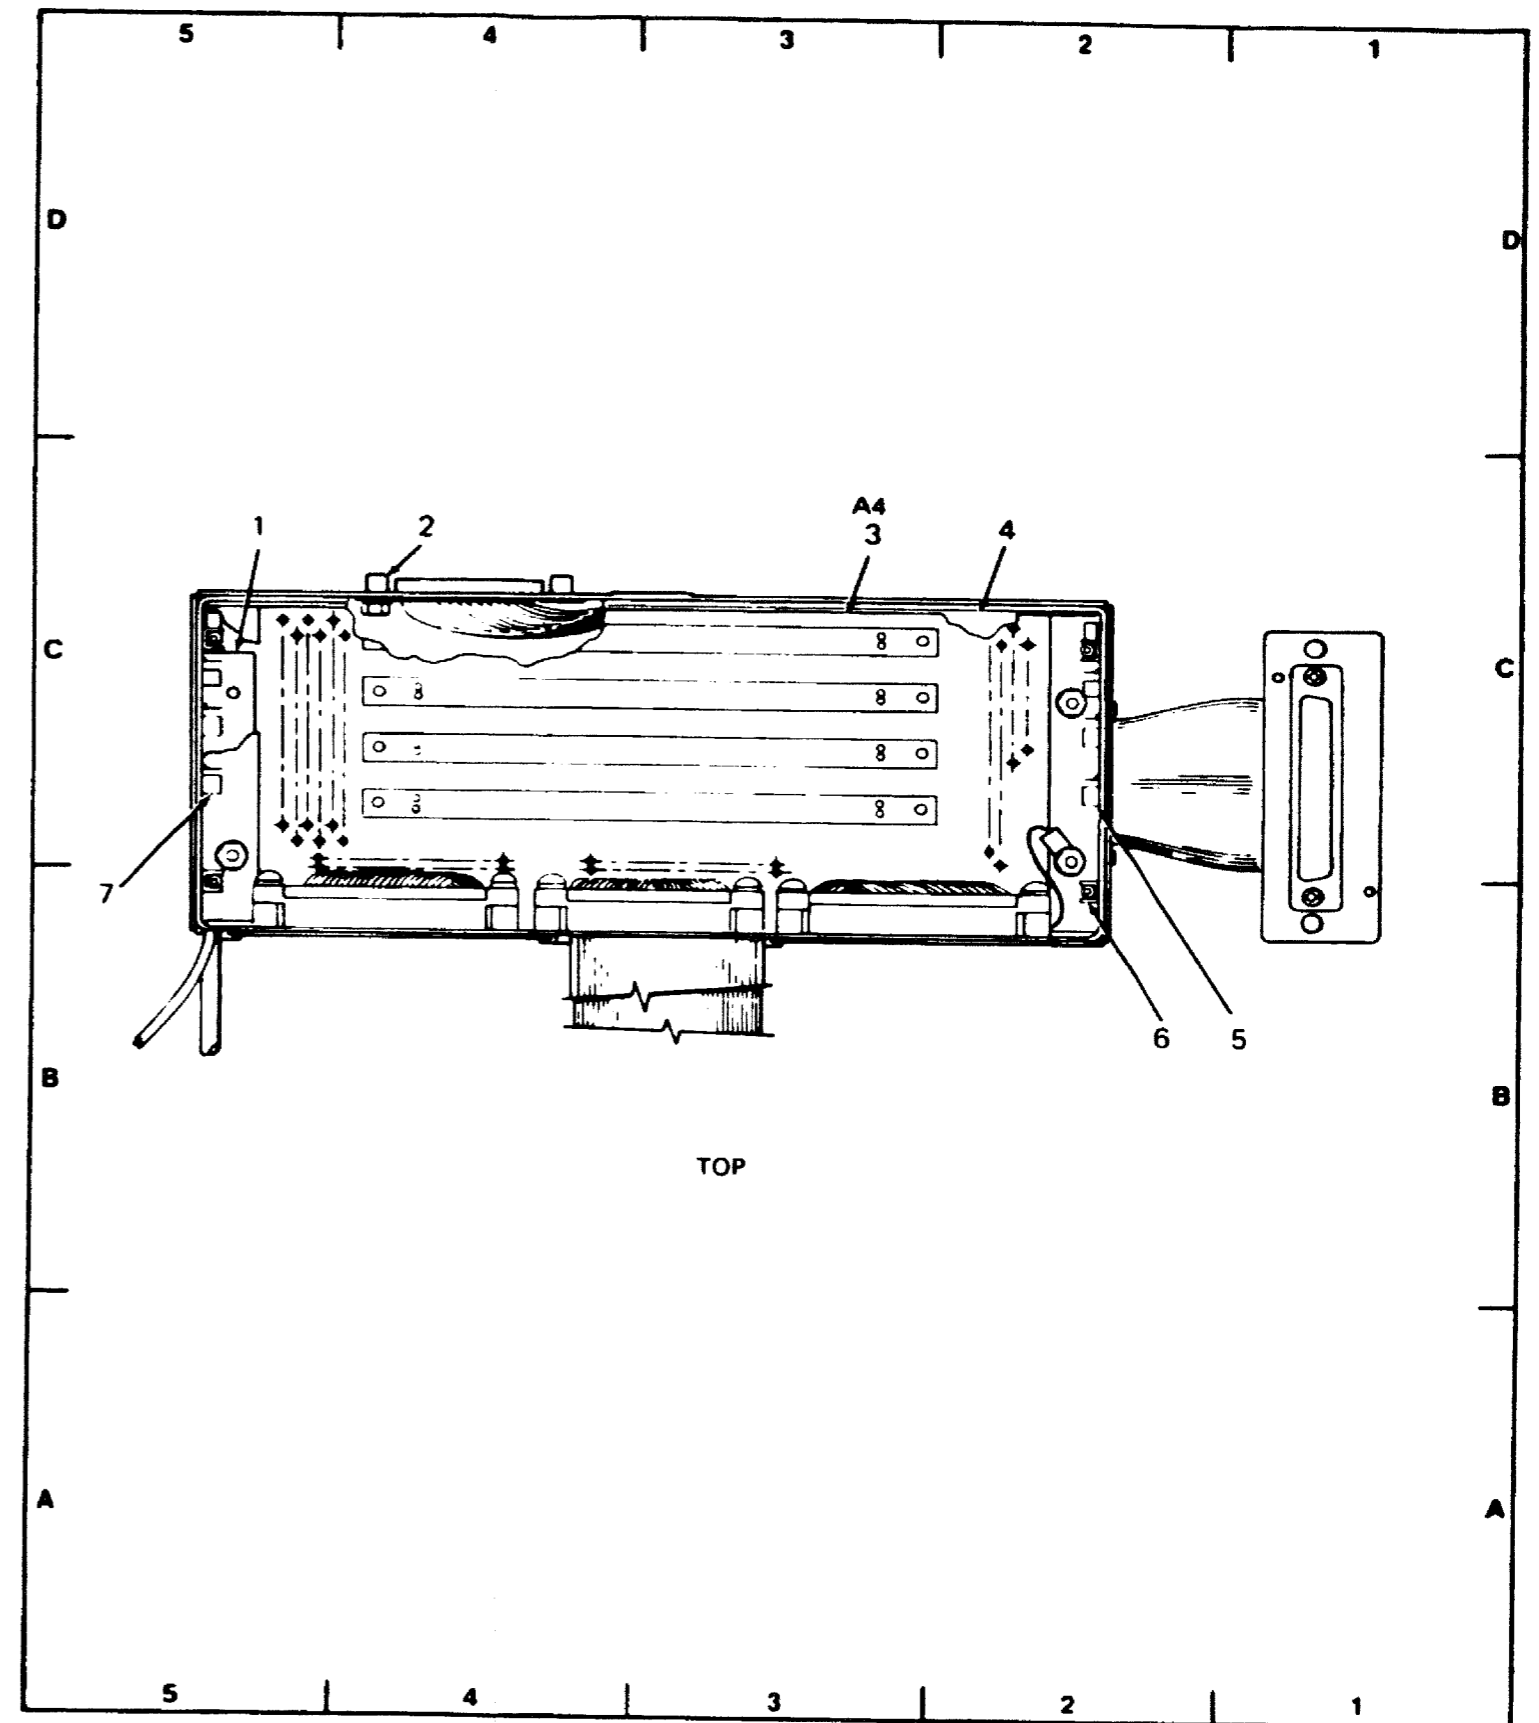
Teleprinter Chassis Assembly (Sheet 2 of 2)
